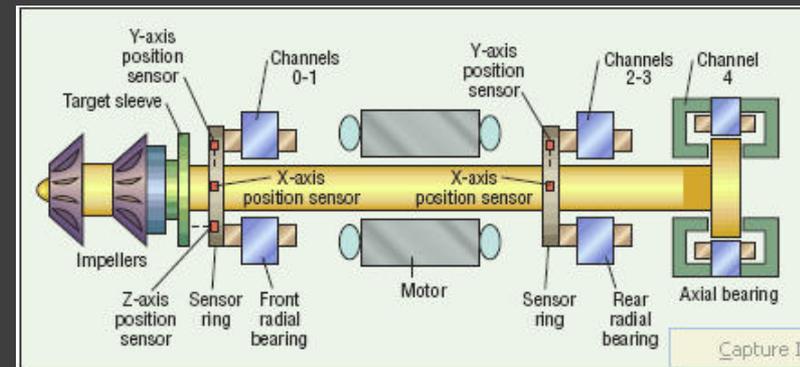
A digitally controlled magnetic-bearing system consisting of two radial and one axial bearing levitate the compressor's rotor shaft and impellers during rotation.
